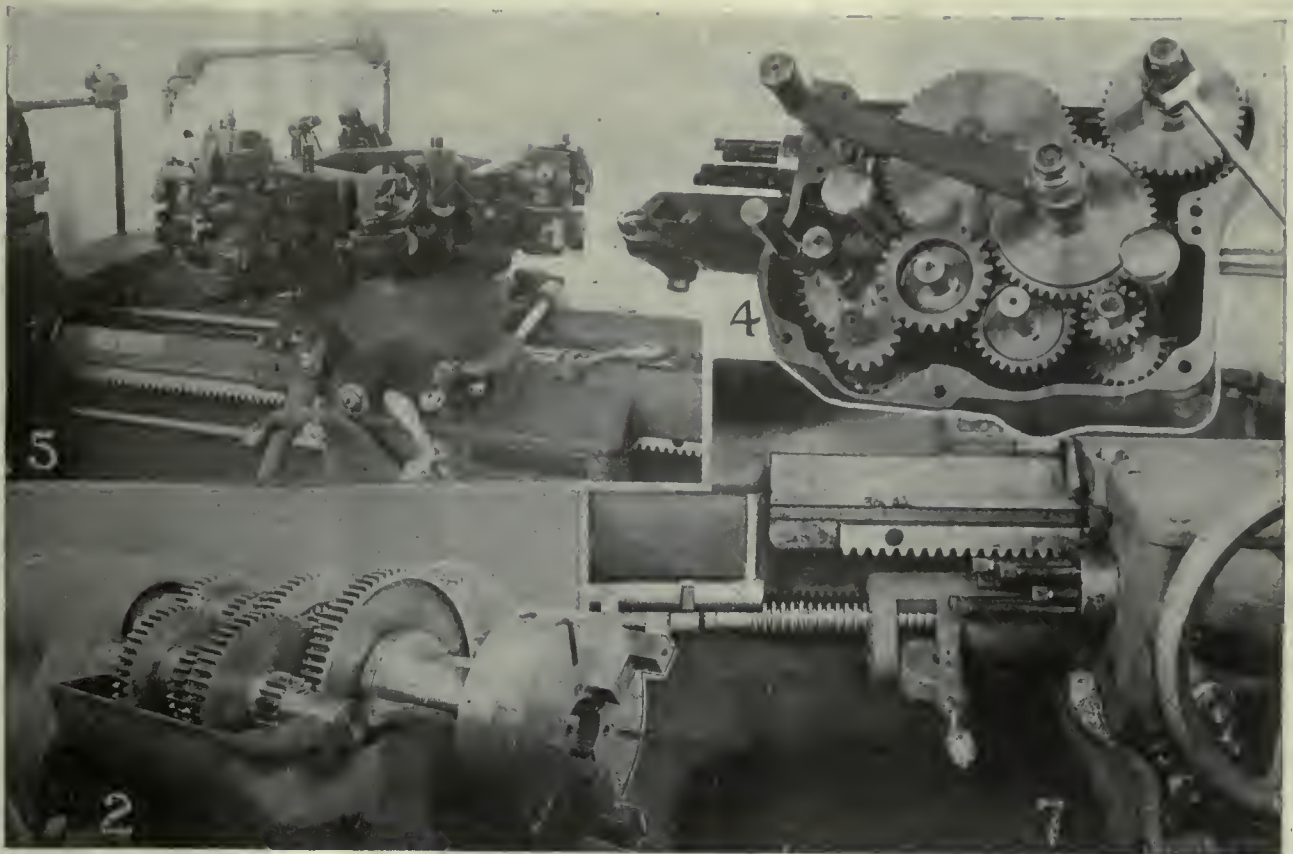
VIEW OF HEAD WITH COVER REMOVED, SHOWING GEARS; FIG. 4—REAR HALF OF CARRIAGE APRON WITH GEARS AND SHAFT IN PLACE; FIG. 5—HEXAGON HEAD AND SADDLE WITH BAR TOOLS IN PLACE; FIG. 7—VIEW SHOWING SCREW-CUTTING ATTACHMENT AND CARRIAGE STOP
